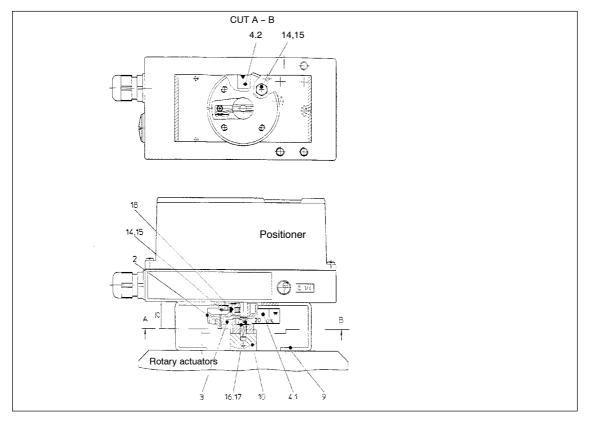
Assembly procedure for explosion-proof version (rotary actuator)
